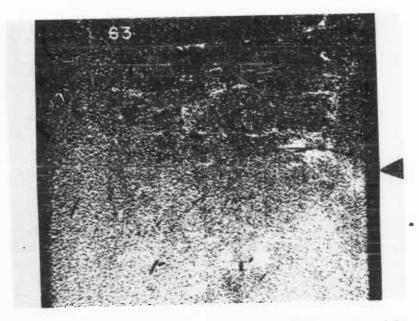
FAILURE IN SPECIMEN NO. 63.
